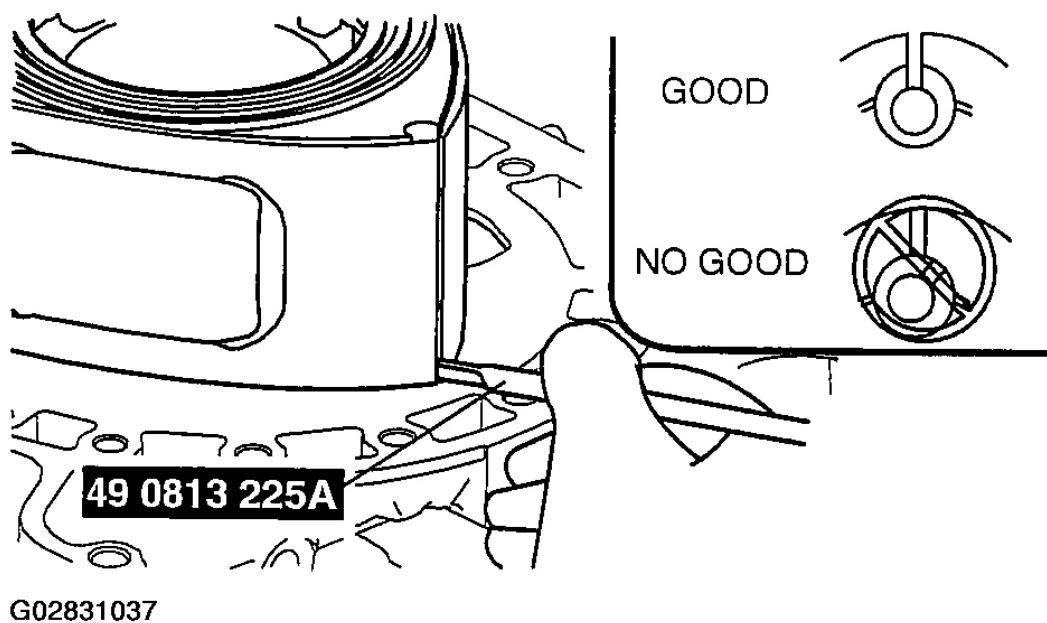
Engine Rear Side, Side Seal & Corner Seal
